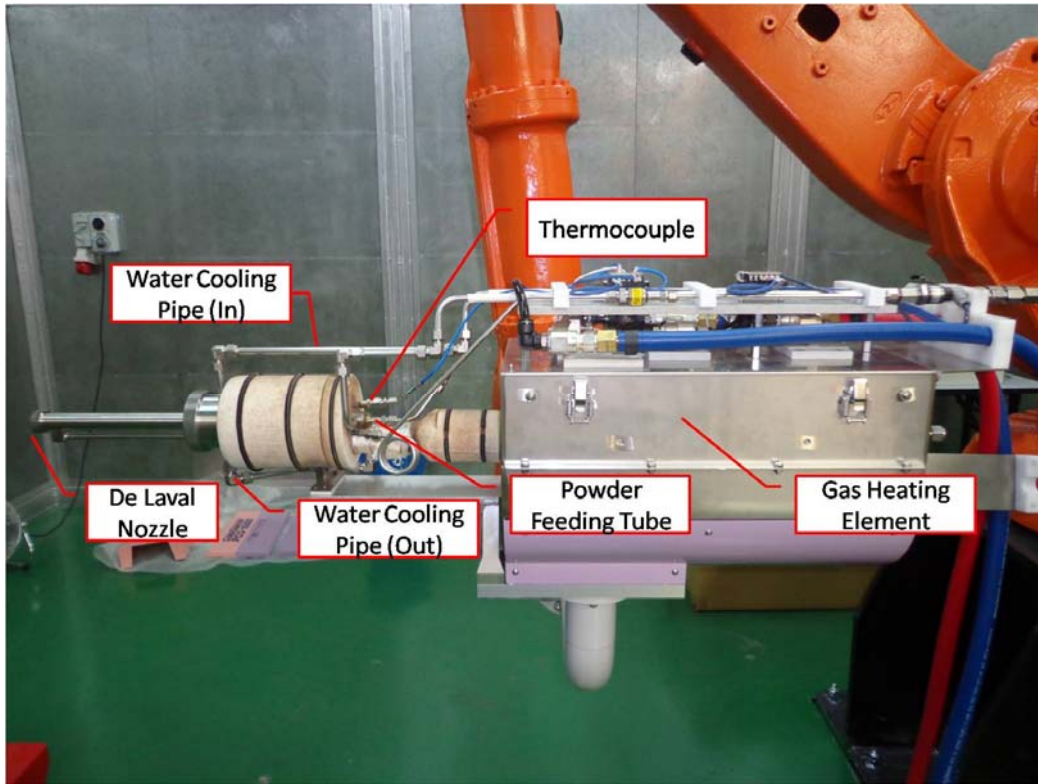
Components in the PCS-1000 cold spray gun unit.
